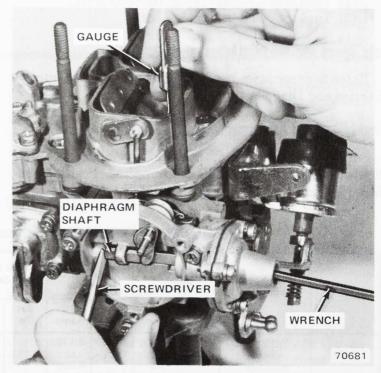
J-32 Initial Choke Valve Clearance Adjustment
